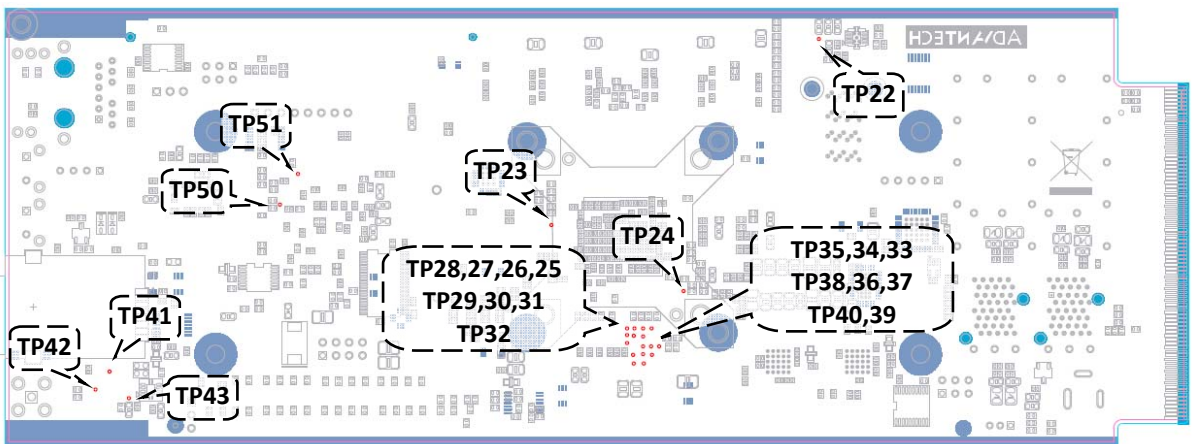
TMDXEVM6614LXE test points on the bottom side
